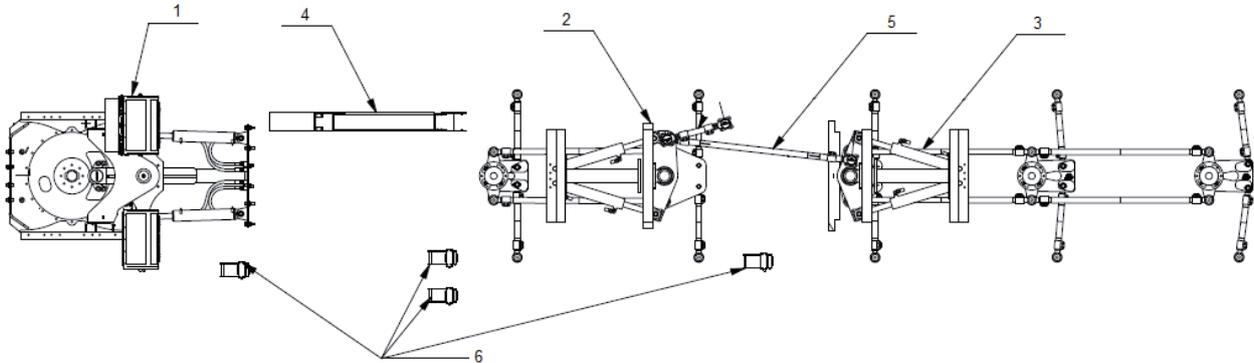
Steering components of the semi-trailer: 1 – elements integrated with the coupling plate, 2 – components built-in in the 2-axle bogie, 3 – components built-in in the 3-axle bogie, 4 – hoses, 5 – rod connecting the steering columns of the 2- and 3-axle bogies (only used in the five-axle configuration with a loading bed), 6 – hydraulic couplers (Multifasters)
